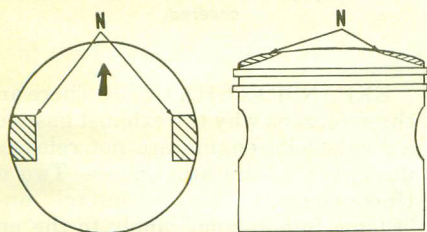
If manufacturer recommends cutting the piston (N) to advance transfer port timing, use extreme care. Depth of cut will weaken piston and possibly damage piston rings.
